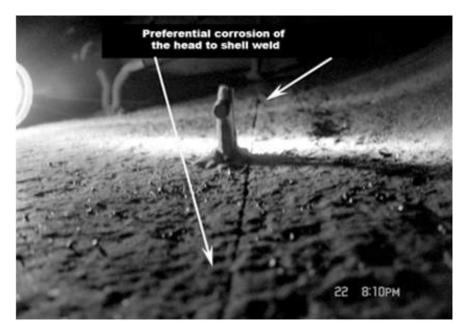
Preferential Corrosion of the Head to Shell Weld
